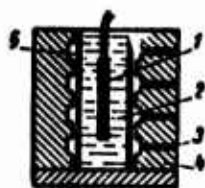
Stamping by explosion of cylindrical EM: 1 - charge; 2 - water; 3 - vacuum channel; 4 - die; 5 - blank.
